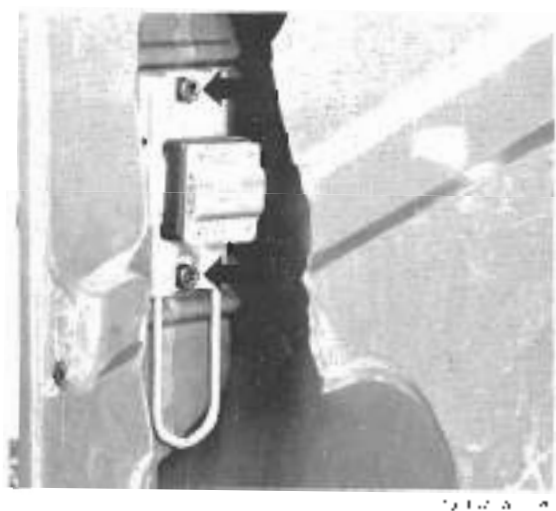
Socket head screws that hold the door check. Remove them with a 5/16 in. Allen key.
